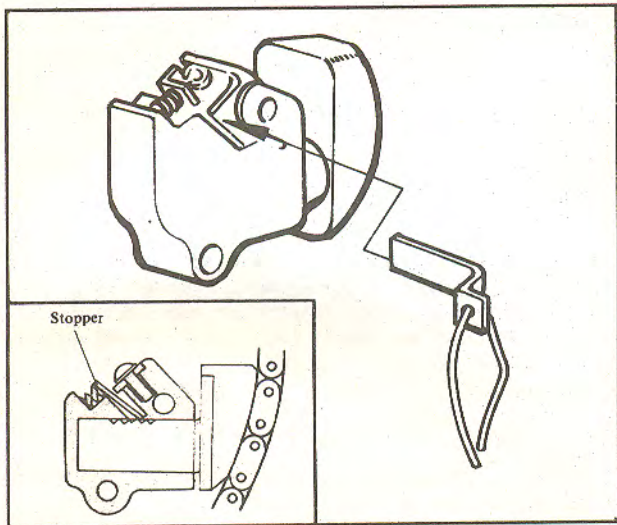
When fitting the timing chain tensioner, insert a home-made bracket into the position shown to lock the tensioner in position until the chain tension is adjusted.
